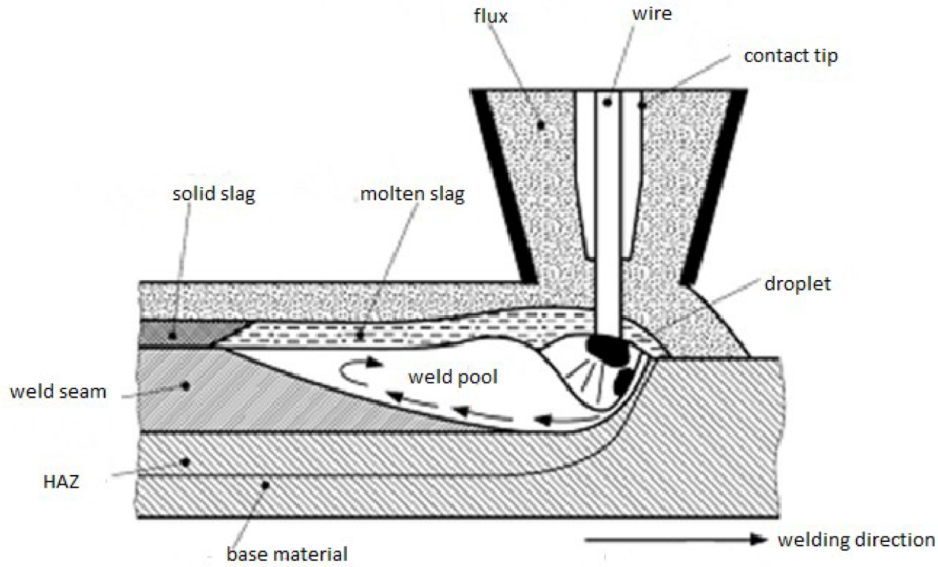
Illustration of submerged arc welding process [80]
